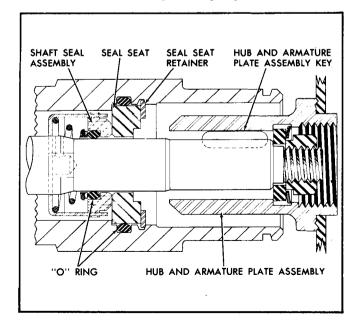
A-33 Cross Section-Compressor Shaft Seal Area
